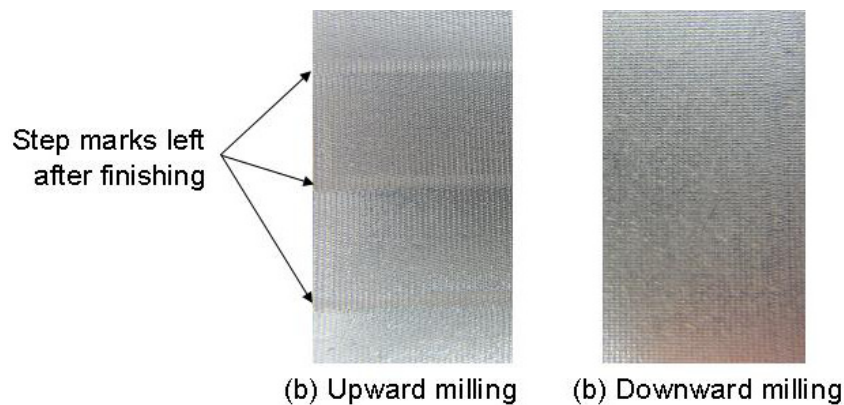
Surface finishing obtained at Surface "C" with 6 mm diameter tool, 45 mm in-balance.
